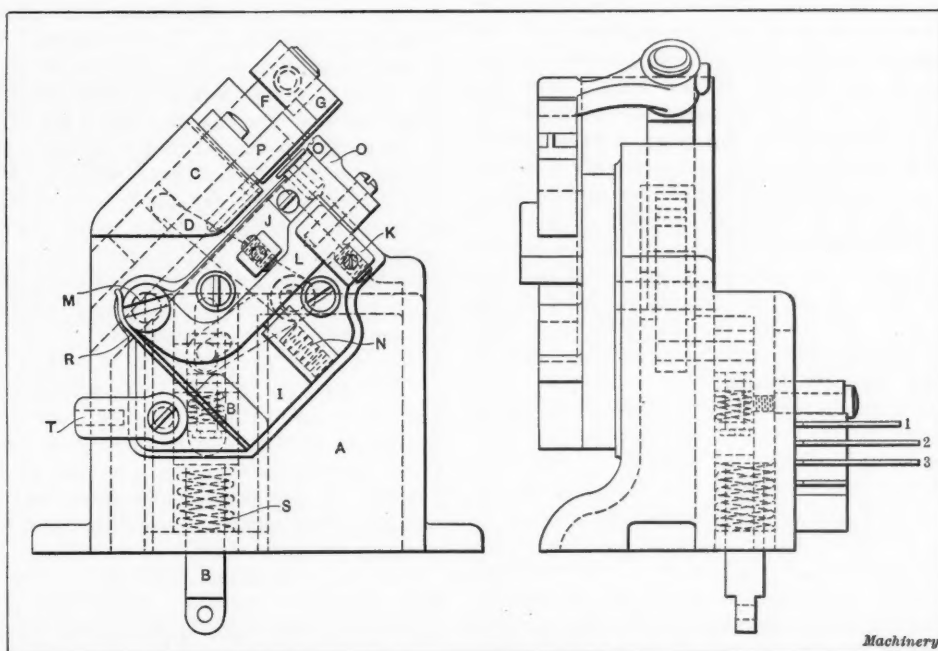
Machine for soldering Straps to Eye-pieces and Bridges
